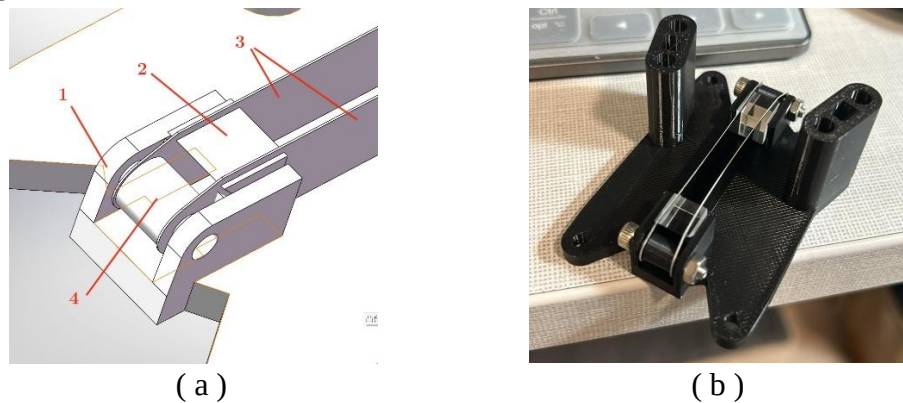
Illustration of Prism positioning mechanism, a. Design file, 1. Prism holder base, 2. Prism, 3. Laser cut metal plate, 4. 3D printed support to keep spacing of two metal plate, b. Real Assembly
